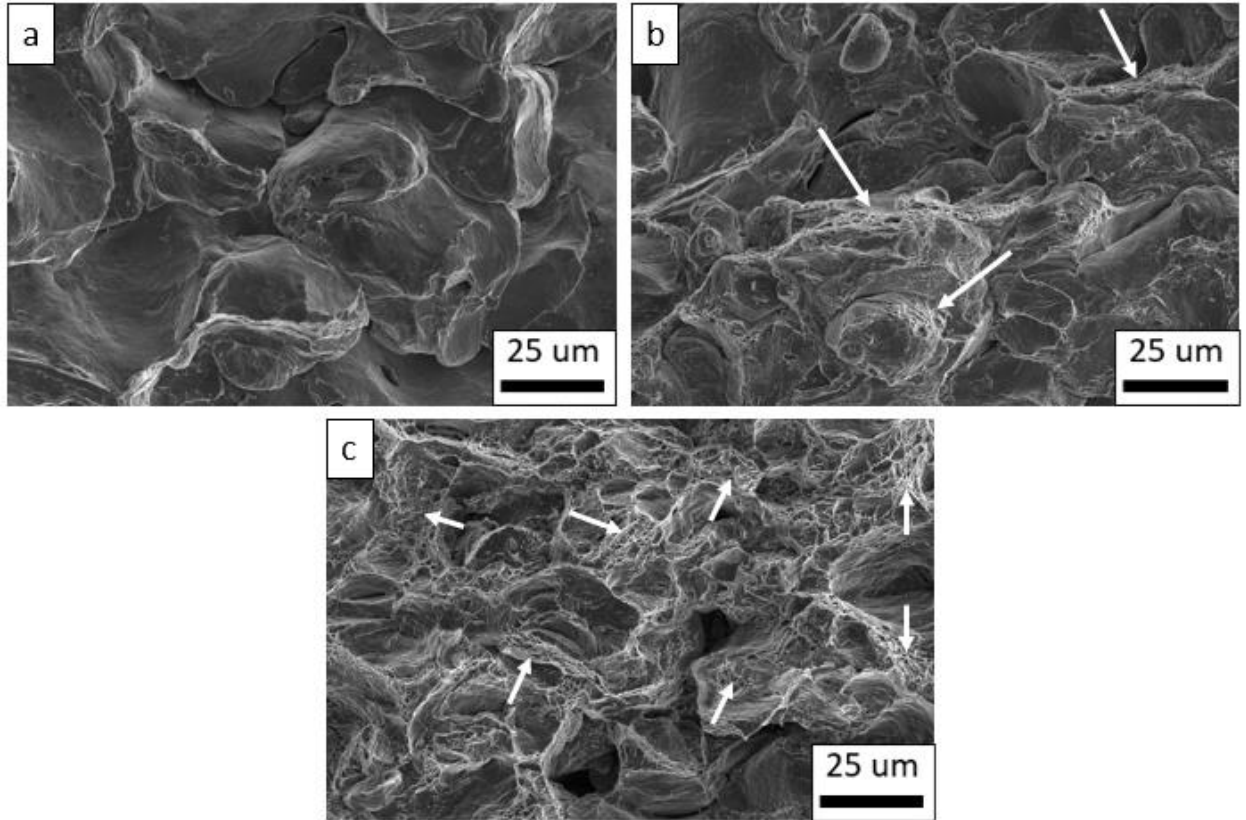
Fracture surfaces of (a) TS-0kW-T, (b) TS-3kW-H, and (c) TS-5kW-H. White arrows indicate ductile dimples.
